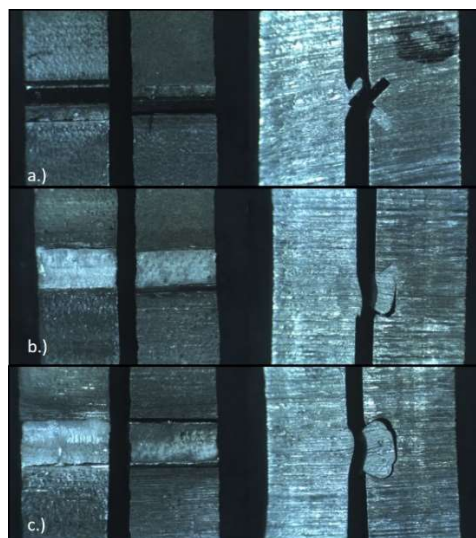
Failure Surfaces and profiles of 3 FSE groove shapes.
